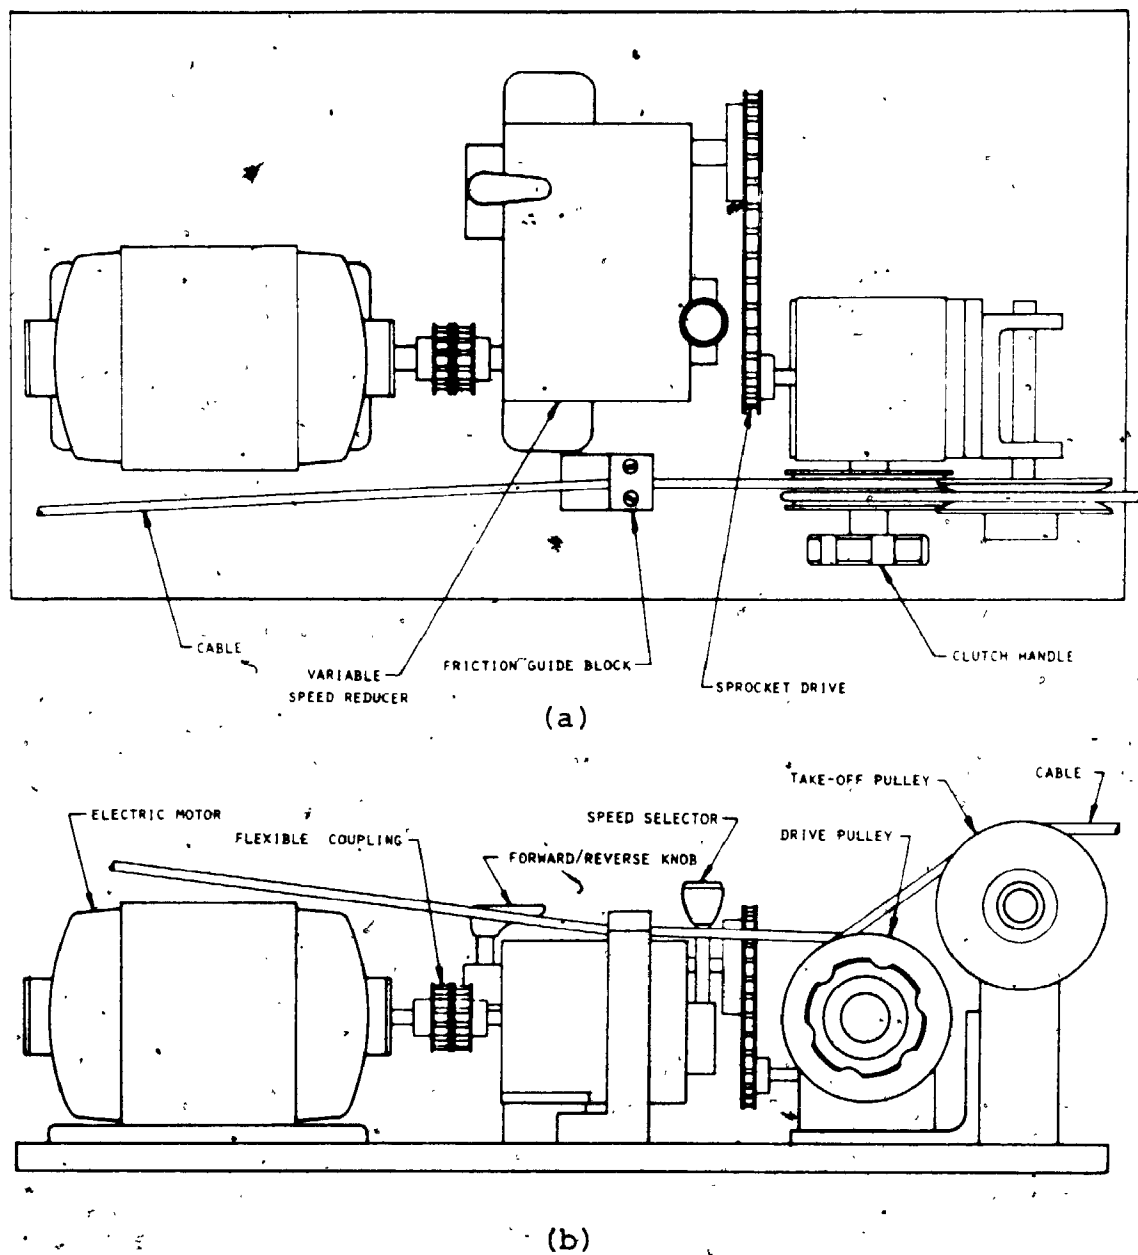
(a) Top view of the constant speed cable drive assembly used in the field tests
